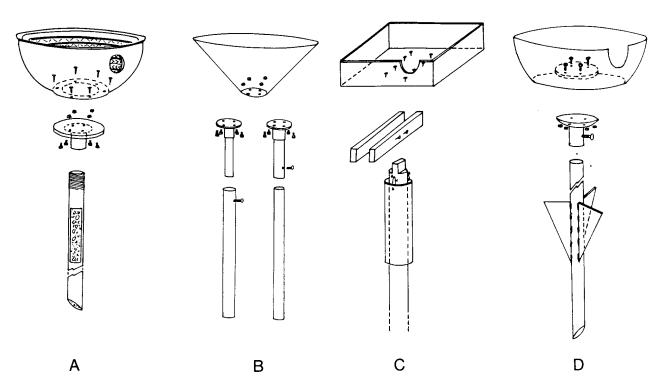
Single-post structures. *A.* Inverted, painted tire attached to threads on the support pipe with a treated plywood disk and a plumbing floor flange. A driving cap is essential to prevent thread damage during installation. The support pipe can be filled with concrete to prevent bending. *B.* Fiberglass cone basket with welded mounting plate and adjustable ferrule mounts. *C.* Wooden box with predator guard made of PVC pipe. The box also can be built 12–18 inches deep with slatted sides to maintain nest material but allow goslings to exit through the 2-inch gaps between slats as the fill level drops. *D.* Fiberglass tub with a mounting plate made from a farm implement disk. The pole is finned to prevent tipping.
